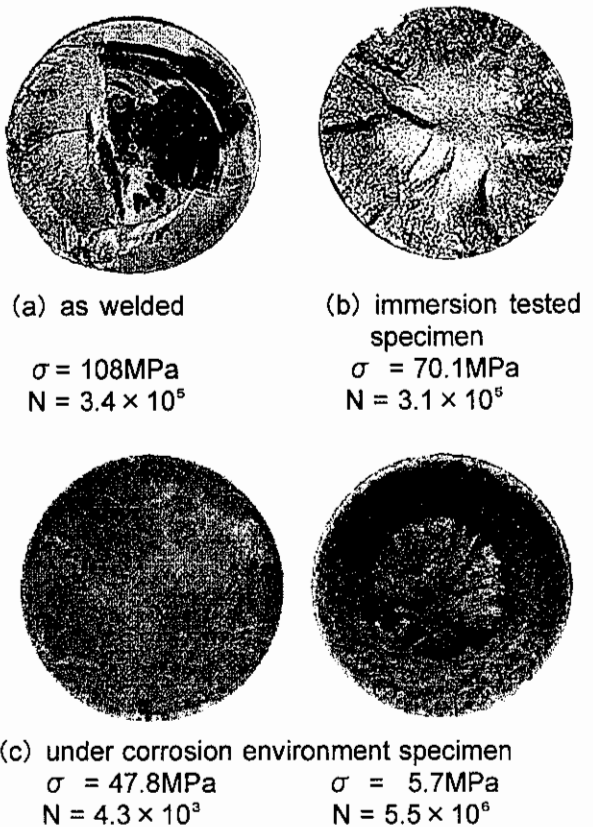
Macrofractographs of fatigue fractured specimens.
